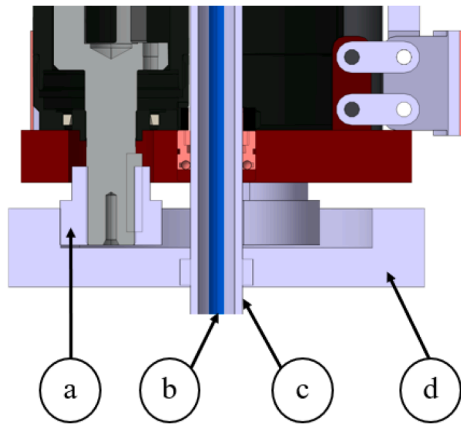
Detail of the reduction gear of the cutting system: (a) pinion (one of three), (b) air cushion feeding pipe, (c) hollow shaft, (d) internal cylindrical gear.
